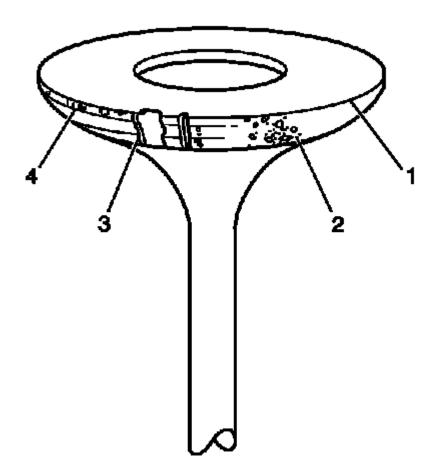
Inspecting Valve Face For Burning, Pitting & Cracking Courtesy of GENERAL MOTORS CORP.
